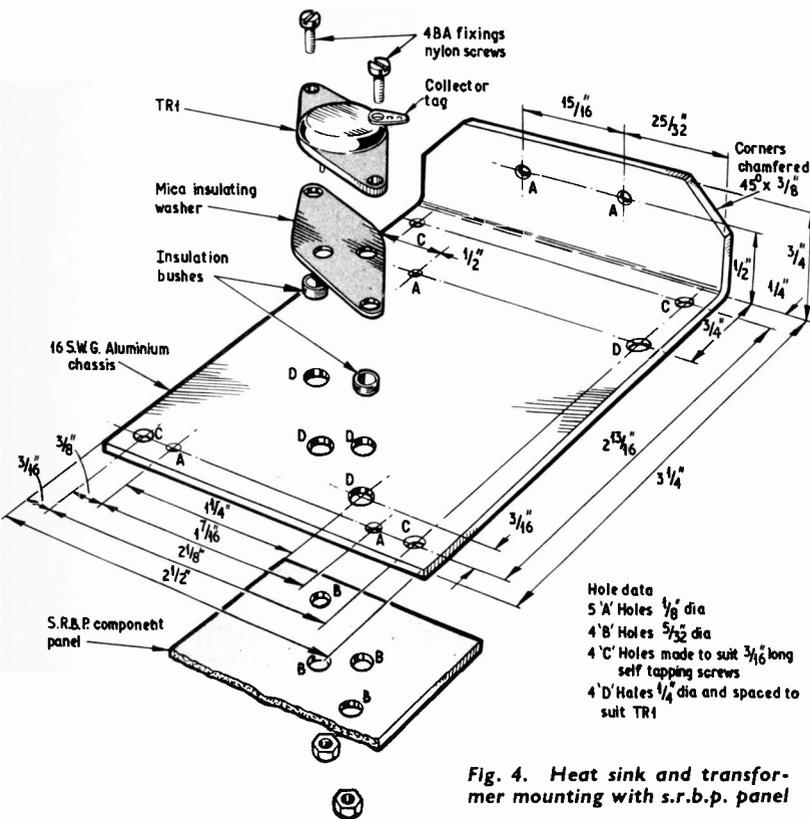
Heat sink and transformer mounting with s.r.b.p. panel
